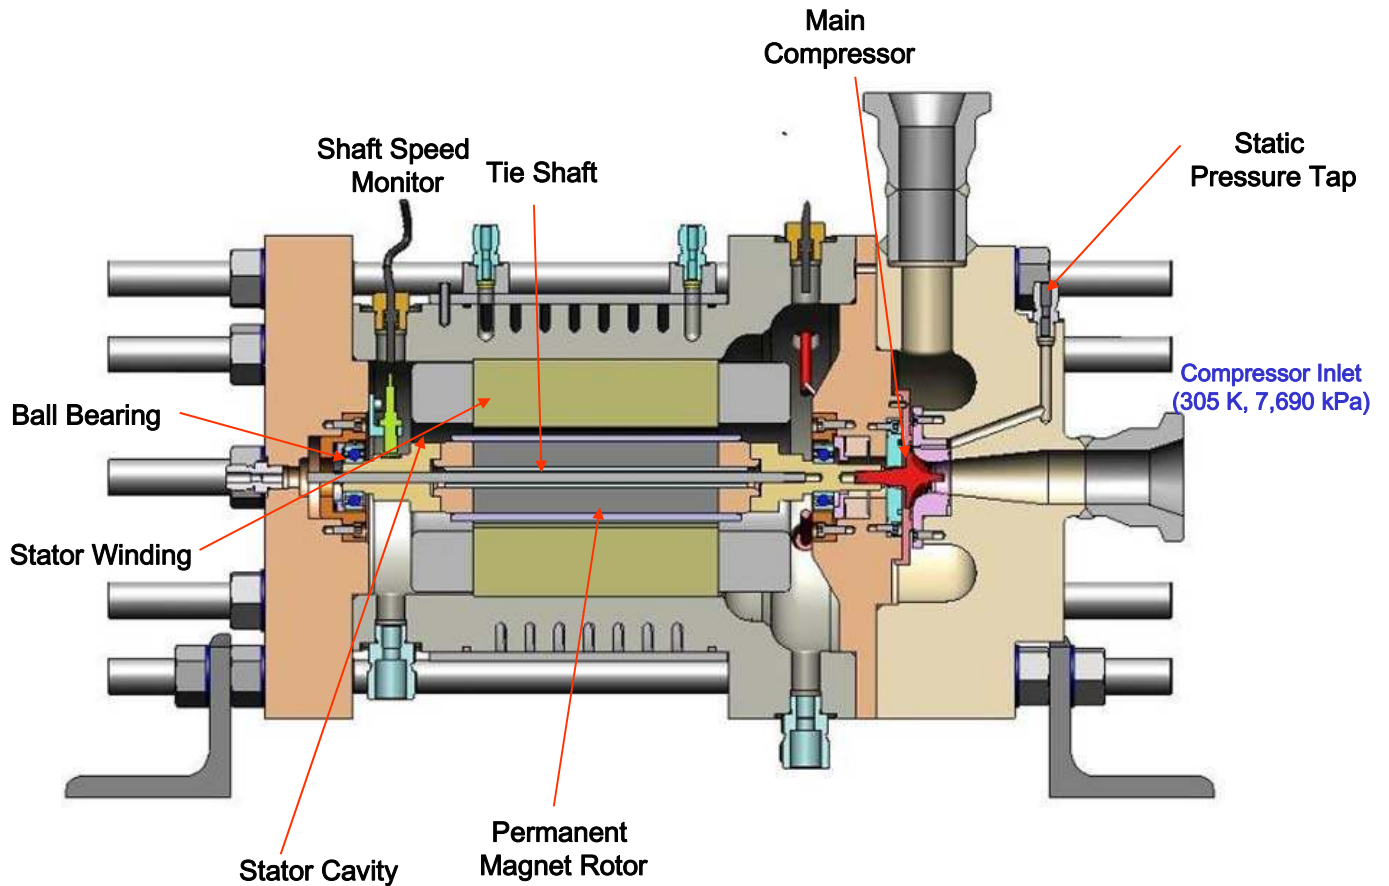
Detailed engineering drawing of the motor-driven compressor for the S-CO₂ compression loop. The slots in the housing provide water cooling capability.
